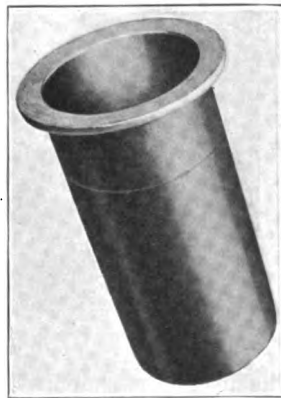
Cylinder liner (threaded), models A, I and E.
